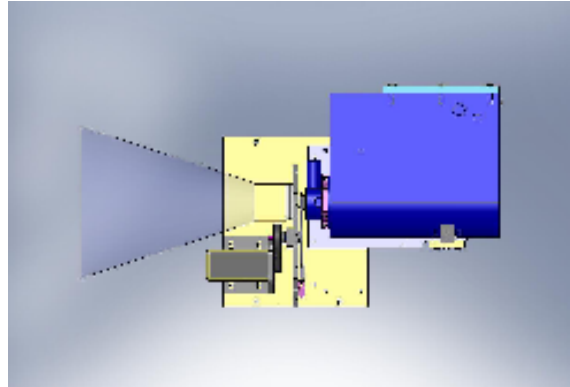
MicroCATII Kevex Mounting Assembly w/ Existing X-Ray Shutter (Front View).
